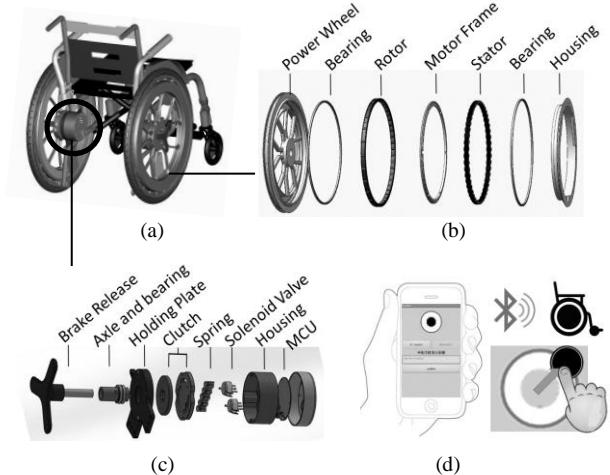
(a) Configuration of the smart wheelchair driven by dual power wheels, (b) rim motor in the power wheel and its components, (c) brake assembly, and (d) remote control on the smart phone.
